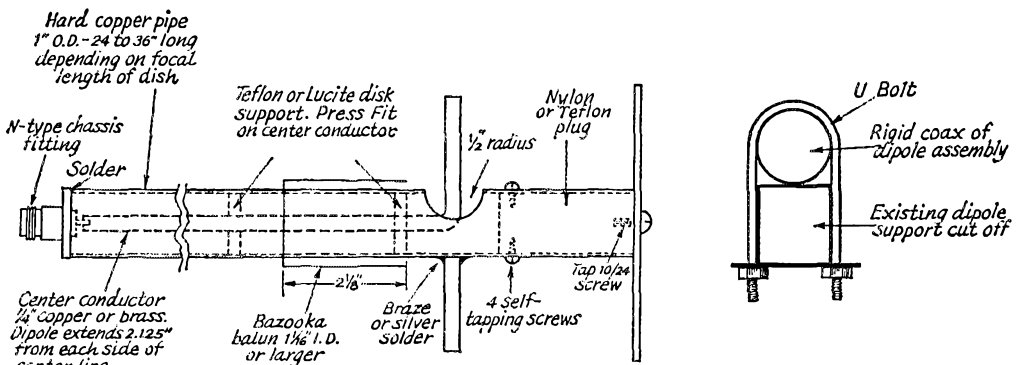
Details of a dipole, reflector and rigid coaxial feed. Silver-plating of copper parts is desirable. Overall dipole length and reflector dimensions are similar to Fig. 1. Dipole-to-splasher spacing ($2\frac{1}{2}$ inches) is less critical if splasher is not grounded to the rigid coax.
